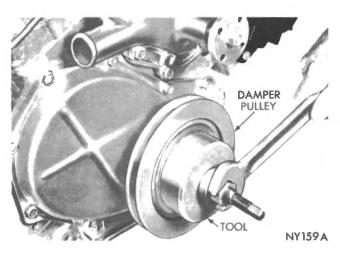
Installing damper pulley assembly (Tool CA-3732).
